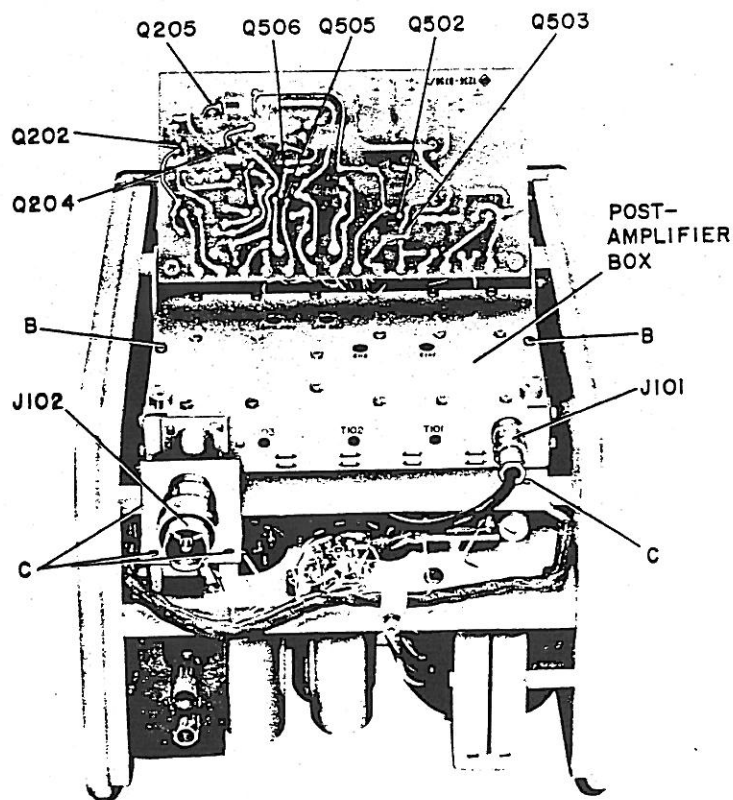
Rear view of 1236 with dust cover removed and the power-supply etched-board pivoted to a vertical position.
